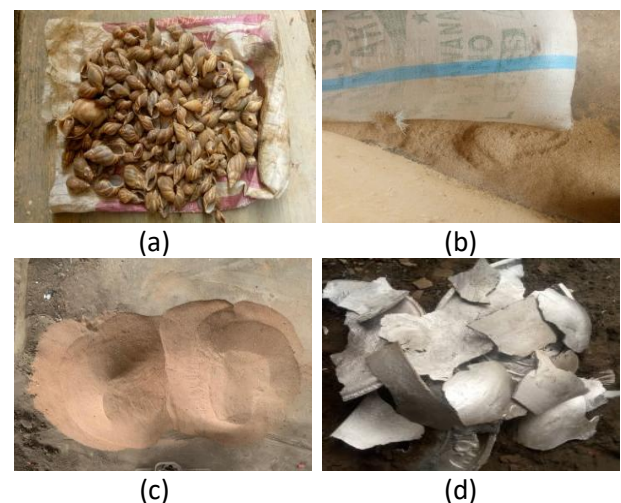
Sand mold materials: snail shell (a), rice-husk (b), Asa river moulding sand (c) and purified aluminum alloy scrap (d)
